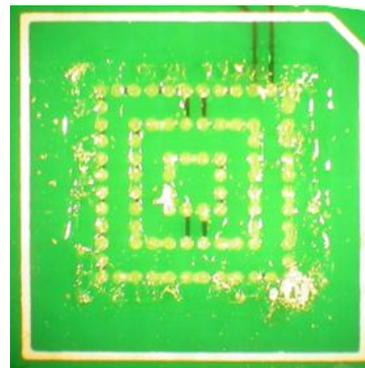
Top view of the PCB after the BGA assembled with epoxy flux A was pried off.
